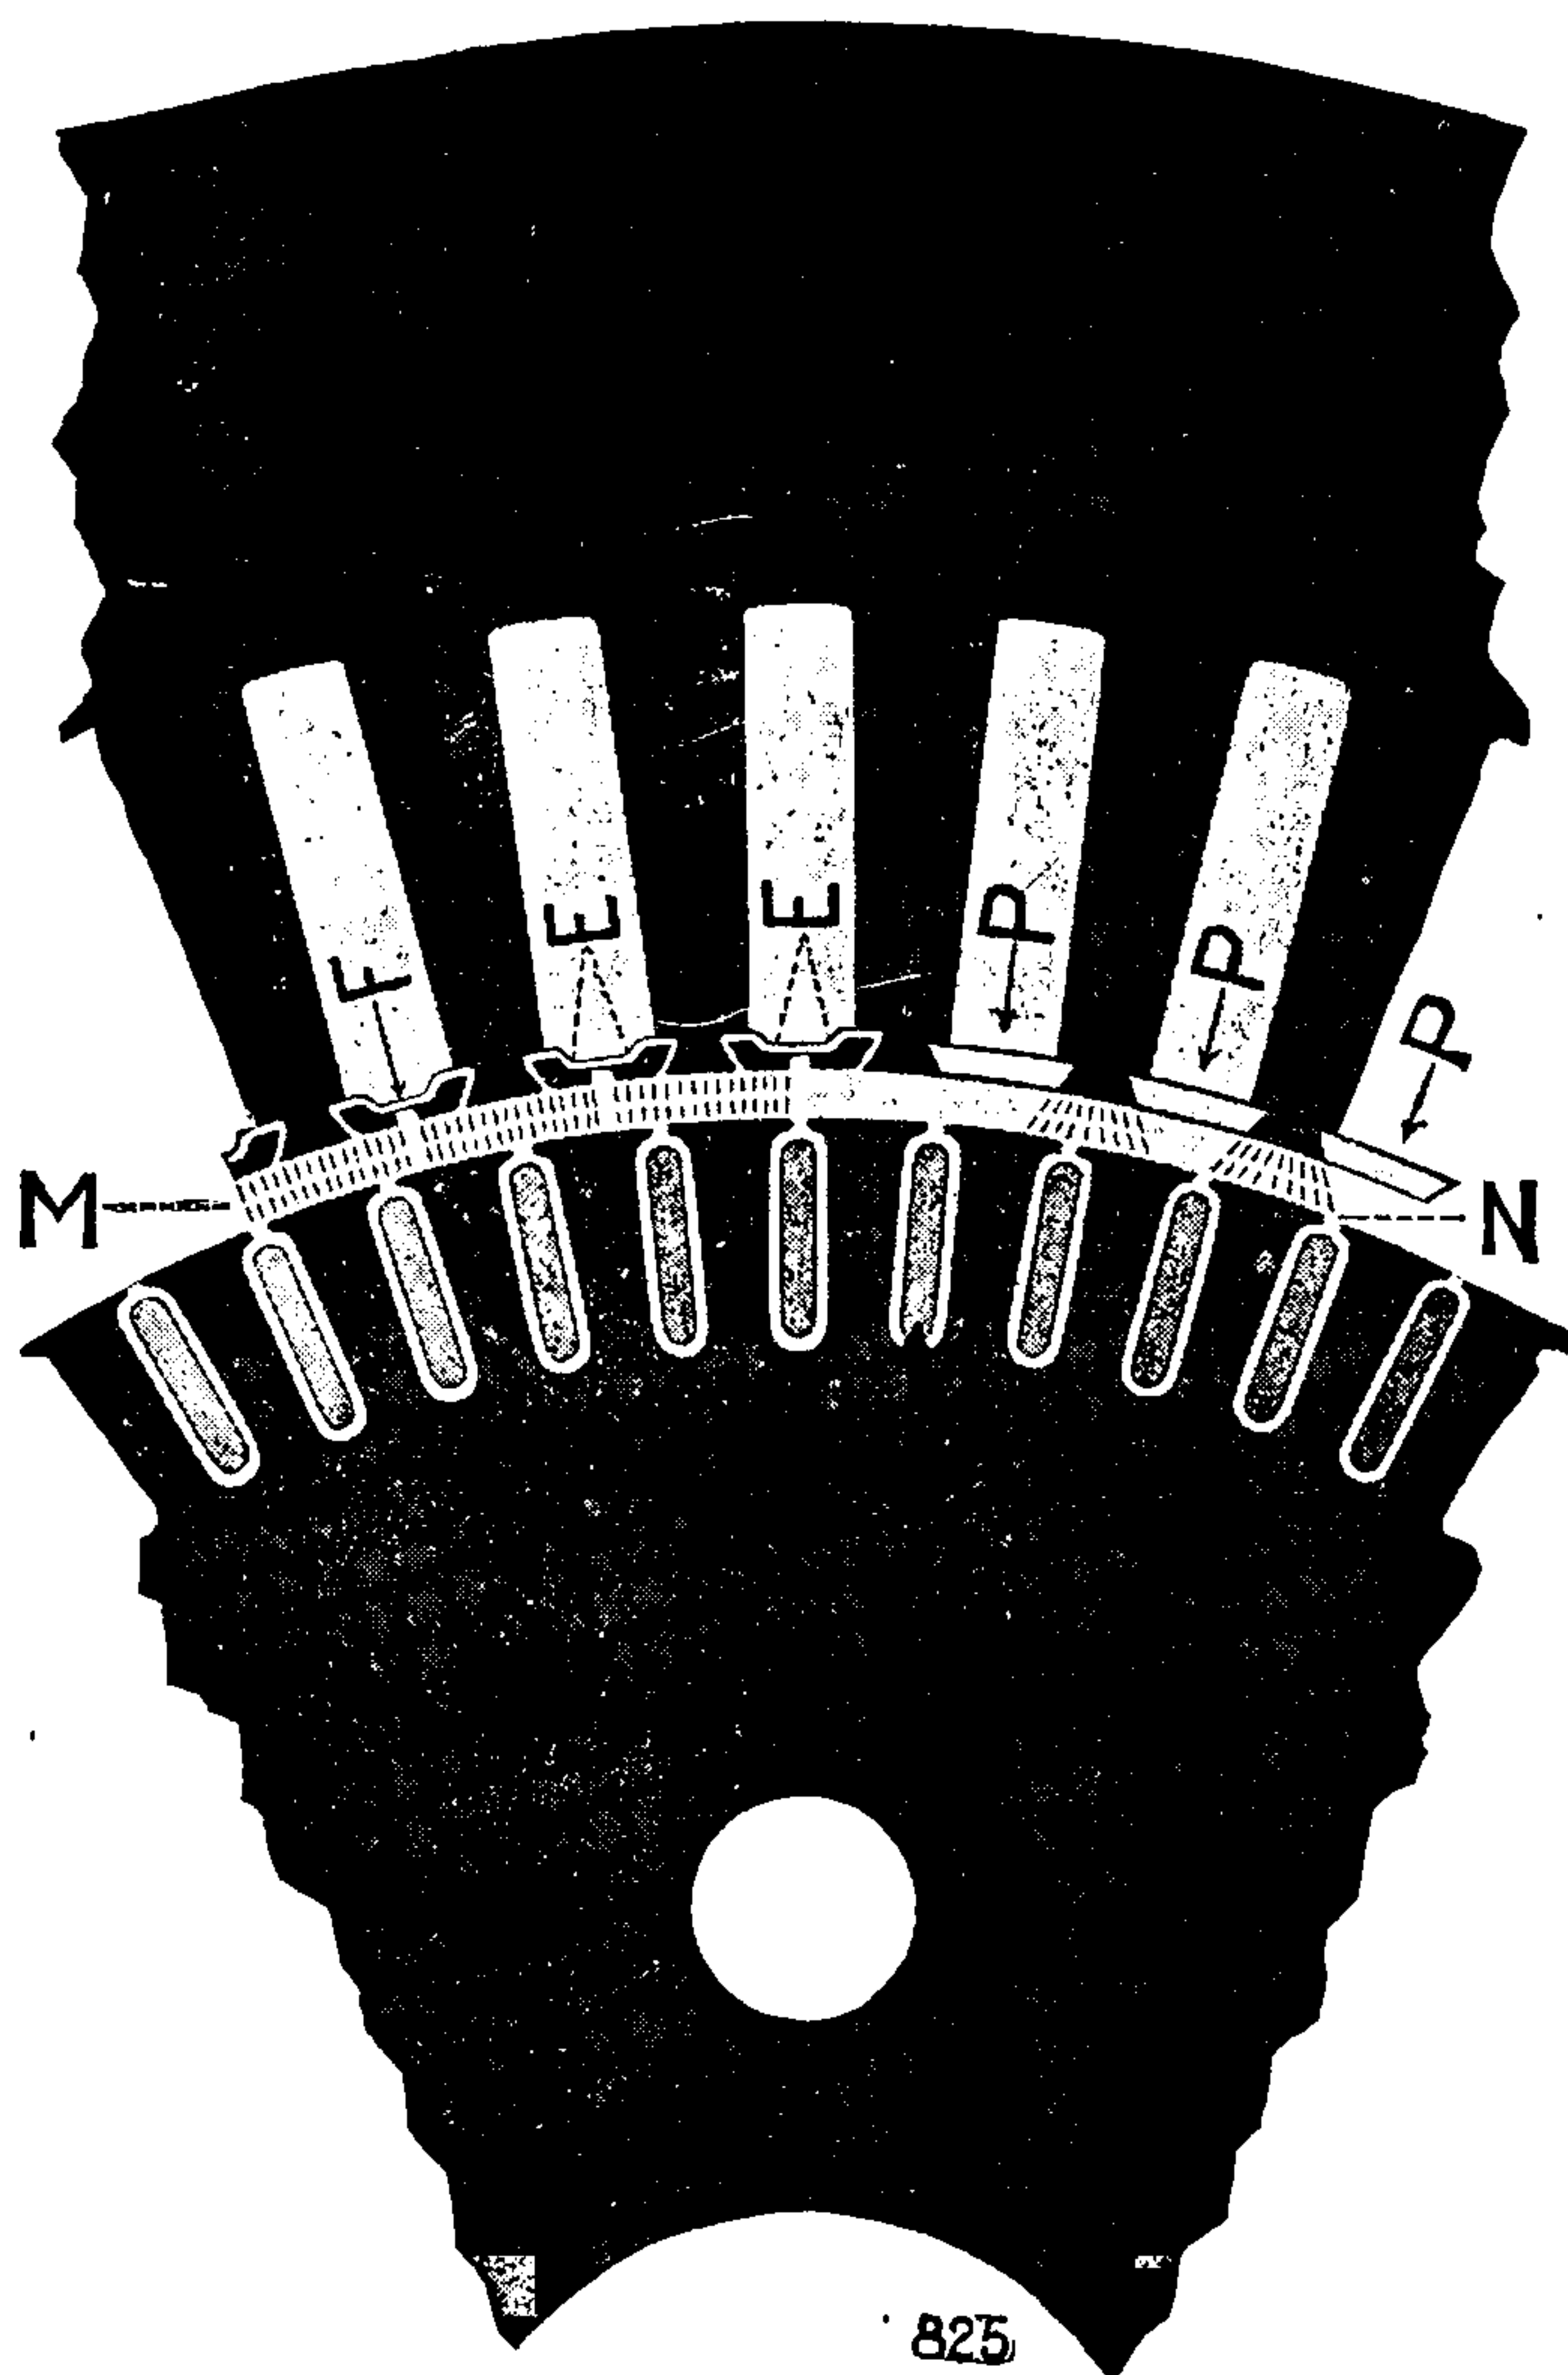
Details of Magnetic Wedges for Crocker-Wheeler Induction Motors
